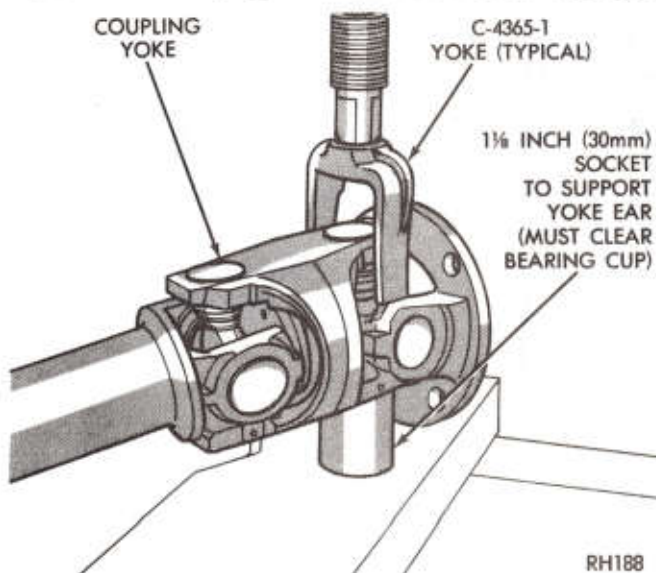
Bearing Cup Removal (Tool C-4365-1)
